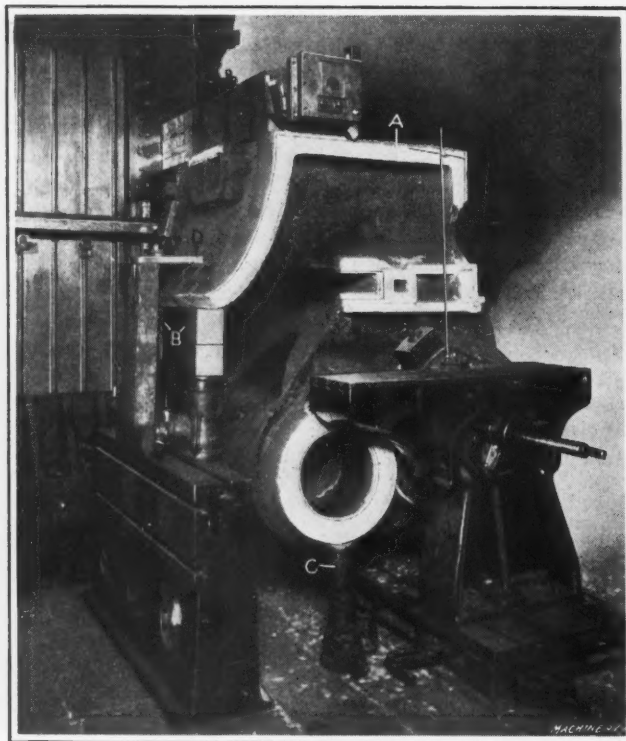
Planing Connection Fit of Cylinder Casting on Draw-out Planer, which also finishes Frame Slots, and bores Valve Chamber
